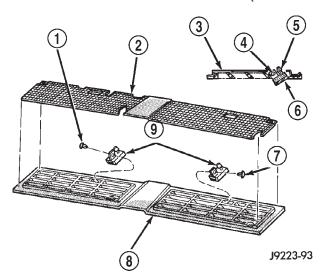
Cowl Grille, Screen & Washer Nozzles
